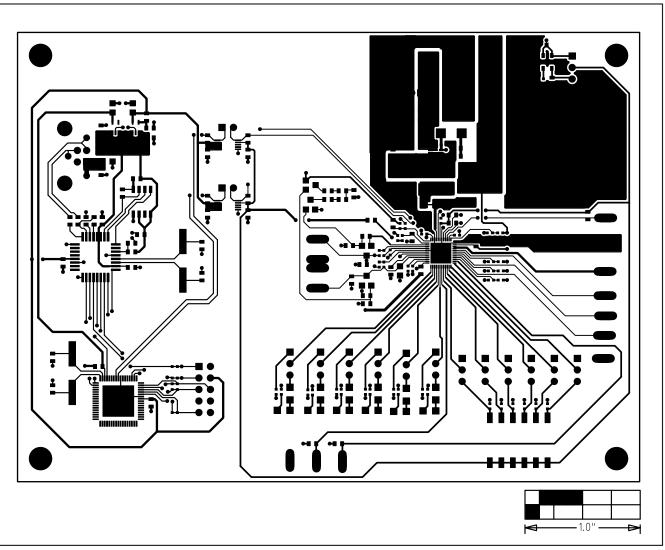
MAX17100 EV Kit PCB Layout—Component Side
